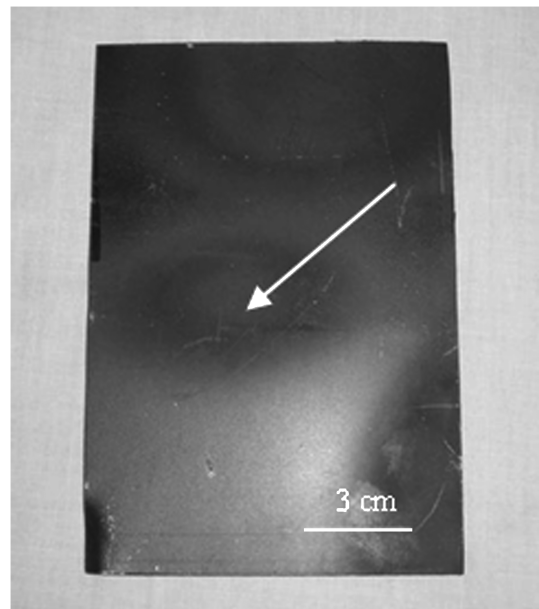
Sample for test 1 (0.8-mm-thick steel painted black with a longitudinal crack 3.5 cm in length).
